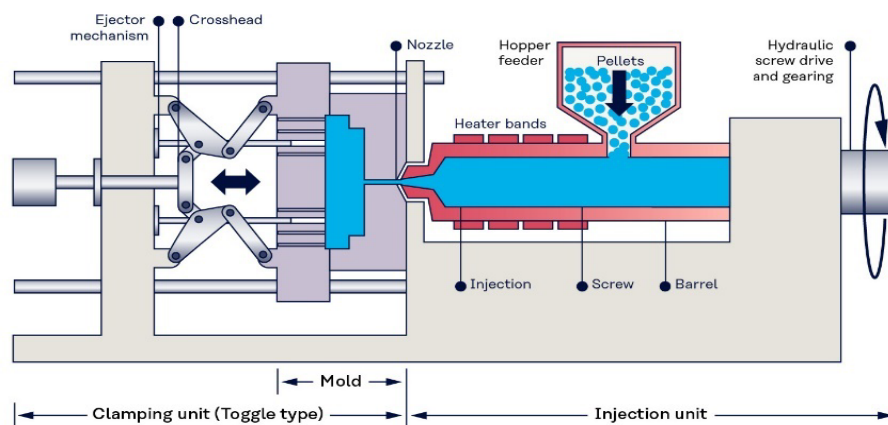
An injection molding machine with its 3 main parts: Injection unit, mold and clamping unit(Conrad 2023).
